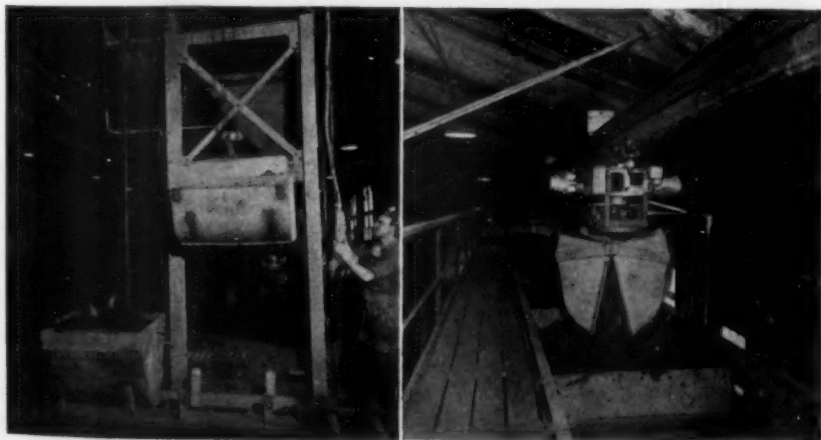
LEFT—SAND-HANDLING BUCKET ARRANGEMENT FOR SMALL FOUNDRY. RIGHT—SAND-HANDLING BUCKET IN DUMPING POSITION.
